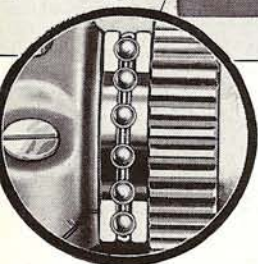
Ball Thrust Bearing for Headstock Spindle.
